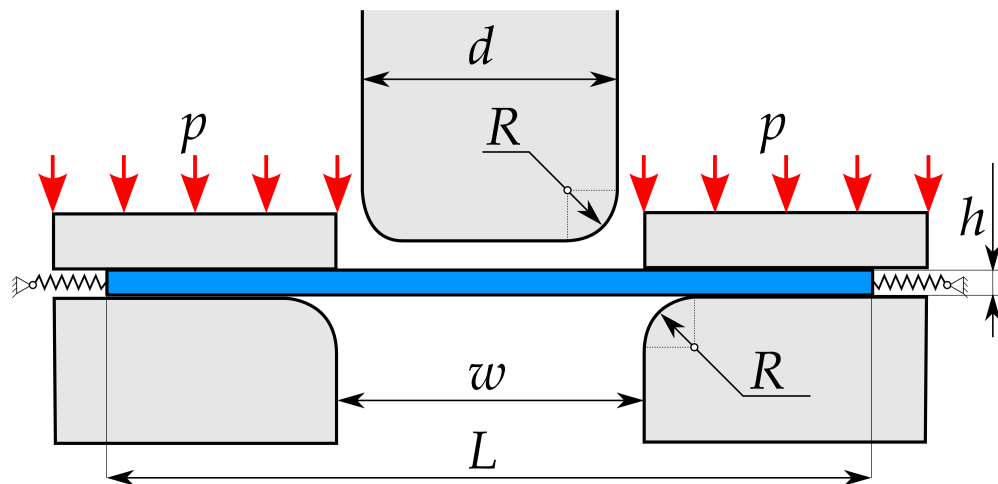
Geometrical setting of the deep cup drawing problem: rounded cylindrical die and metal sheet fixed within the tool.
